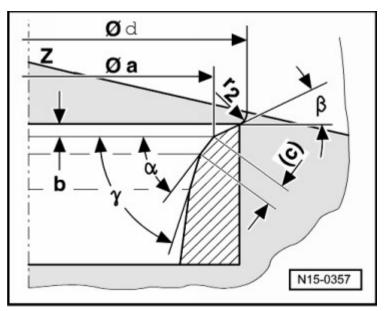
Identifying Angles And Dimensions To Rework Exhaust Valve Seat Courtesy of AUDI OF AMERICA, LLC
